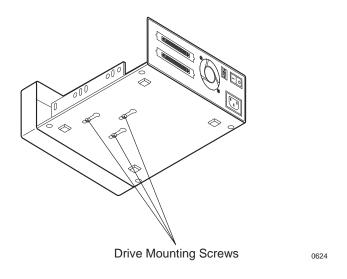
Loosen the Drive Mounting Bracket Screws (DS50 1-Bay Shown)
